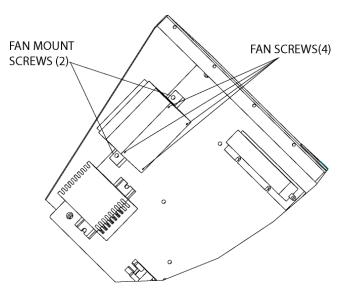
Top View of System Cooling Fan-Baffle Assembly
